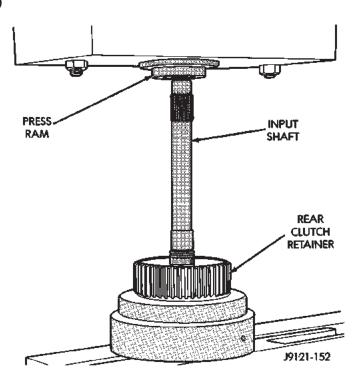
Pressing Input Shaft Into Rear Clutch Retainer
